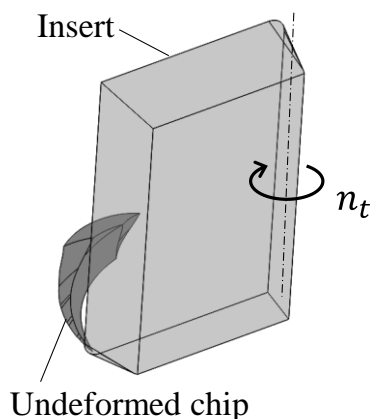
Undeformed chip geometry of the 3D-CAD analysis.
